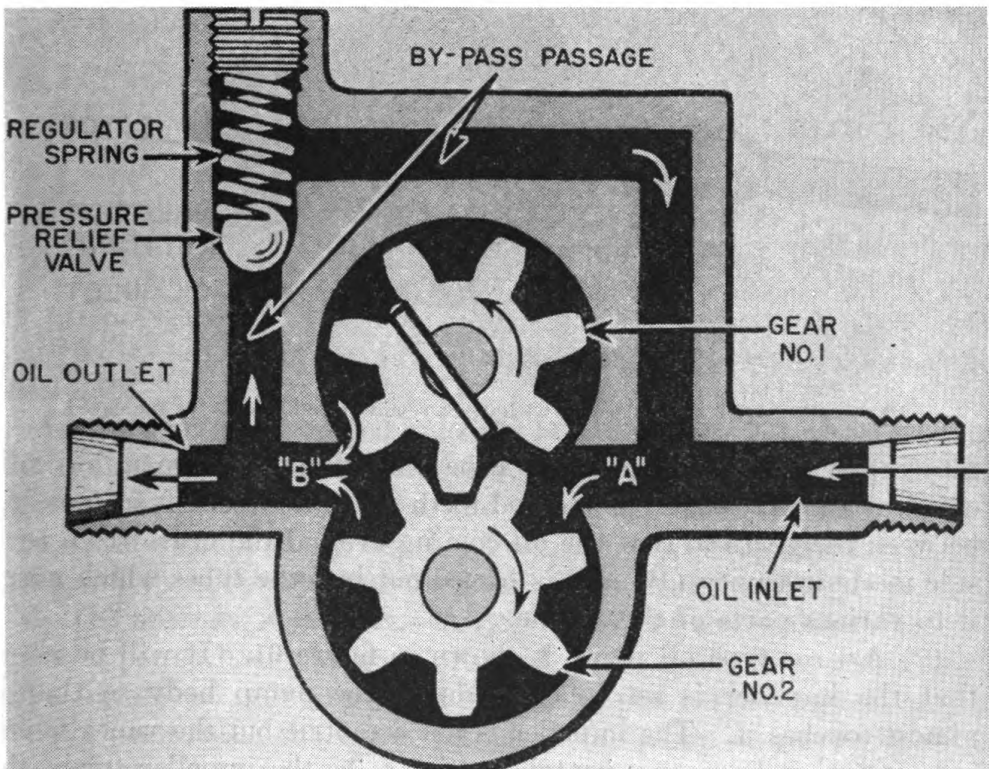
Gear type oil pump with cover removed, showing oil passage and pressure relief valve.
